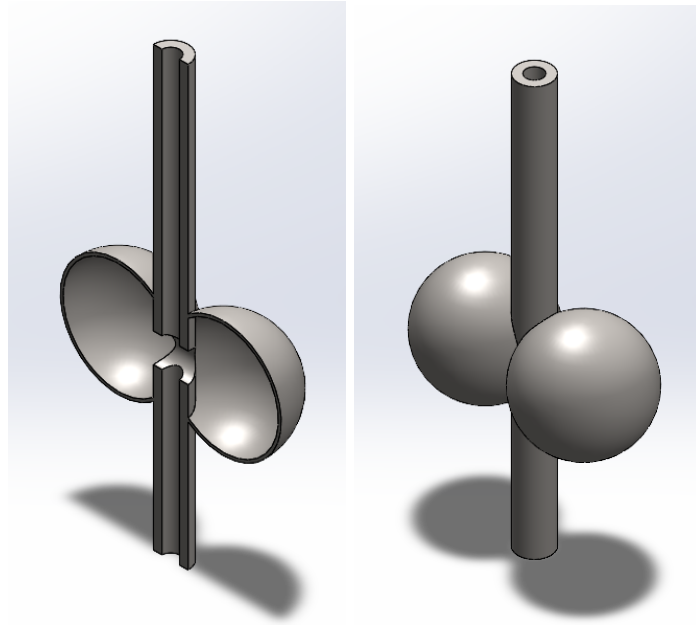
SolidWorks Drawings by Shelby Berry. Note: this is not the final design for our product and is merely a rough 3D printed prototype. Balloons will not be open to the feeding tube and nutrition solutions will not enter the balloons. Slight changes have been made to the design for the purposes of printing a prototype. The inflated diameter of the device at its widest point is 3.5 cm, which is greater than the LES at 3 cm. The external diameter of the tube is 6 mm and the internal diameter of the tube is 3 mm.
